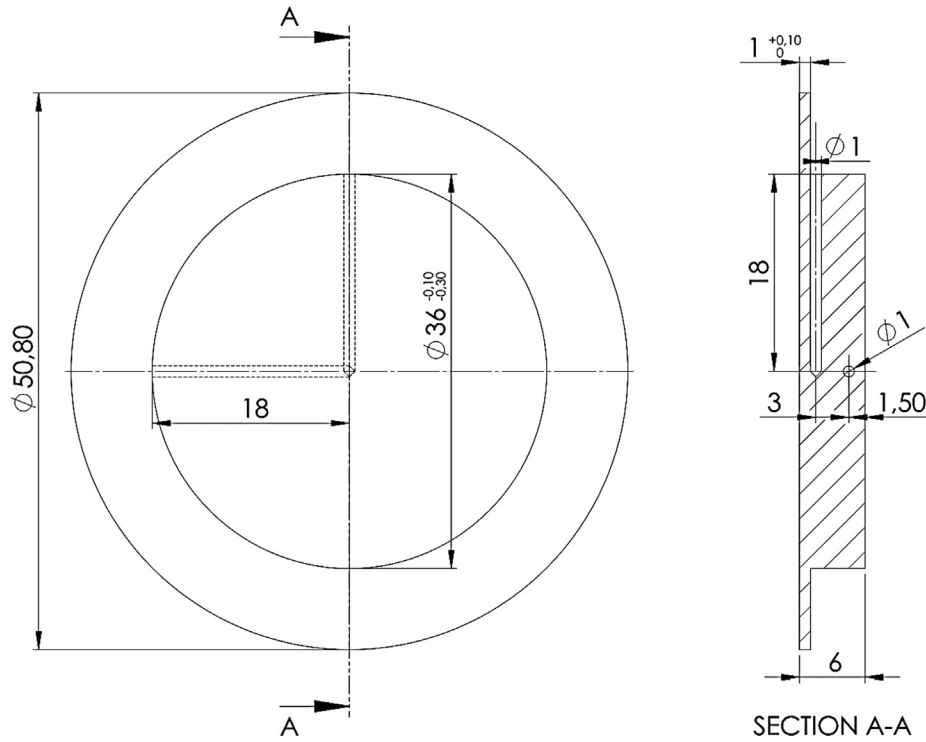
Technical drawing of the heat sink support. The holes allow for the insertion of thermocouples at different axis depths.
